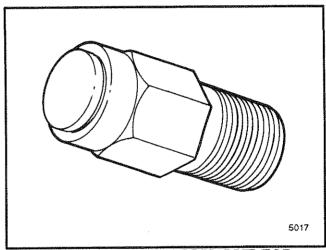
RELIEF VALVE FOR COOLING OIL, W3.5B
